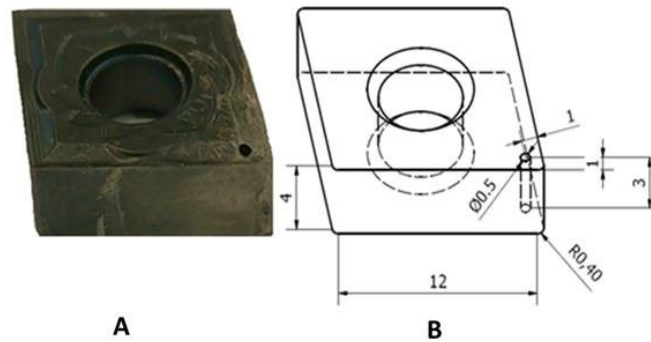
Photo of the actual tool modified by electro-discharge machining (A) and CAD drawing of the tool (B)
